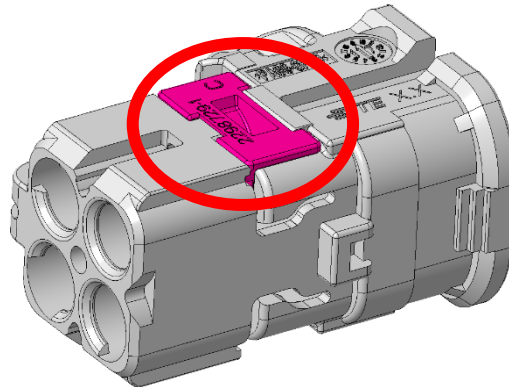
BOTH SIDED LOCKED TPA (ENDLOCK POSITION)
